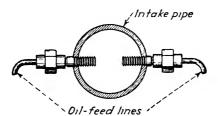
Feed lines supply atomized oil into intake pipe (Courtesy of Double Seal Ring Co)
